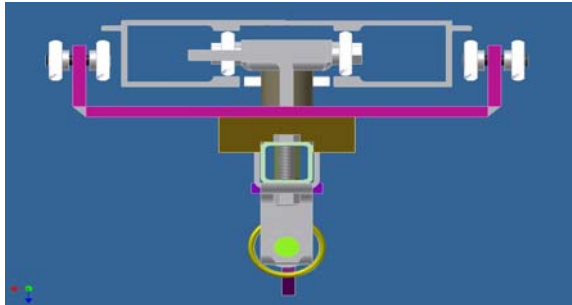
Cross Section View of Chain Guide and Trolley
